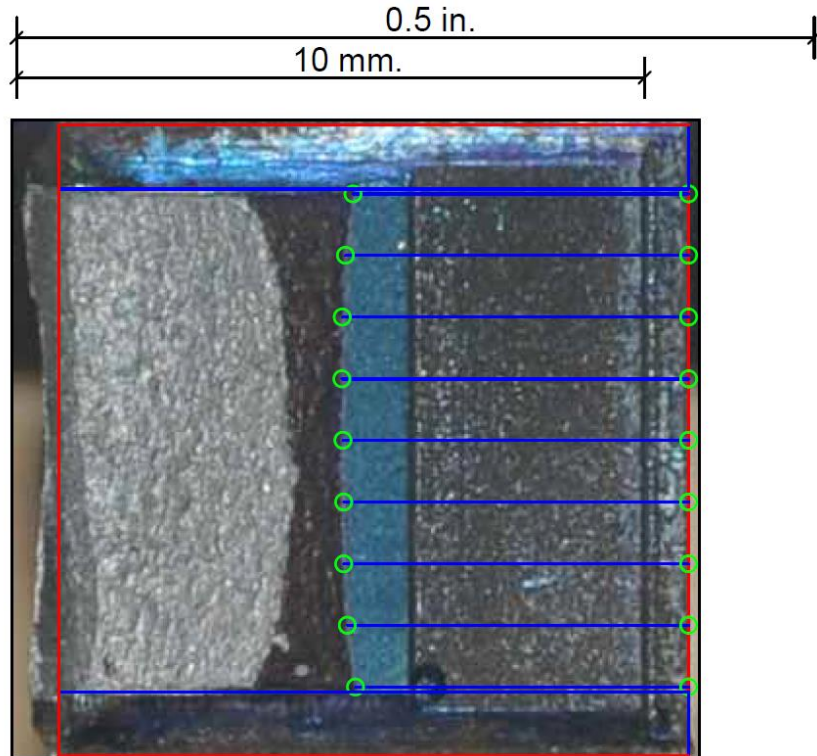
Specimen E13' Fracture Surface
